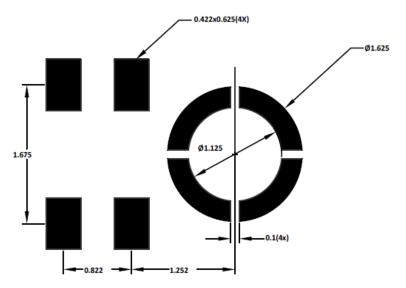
Suggested Solder Paste Stencil Pattern Layout
